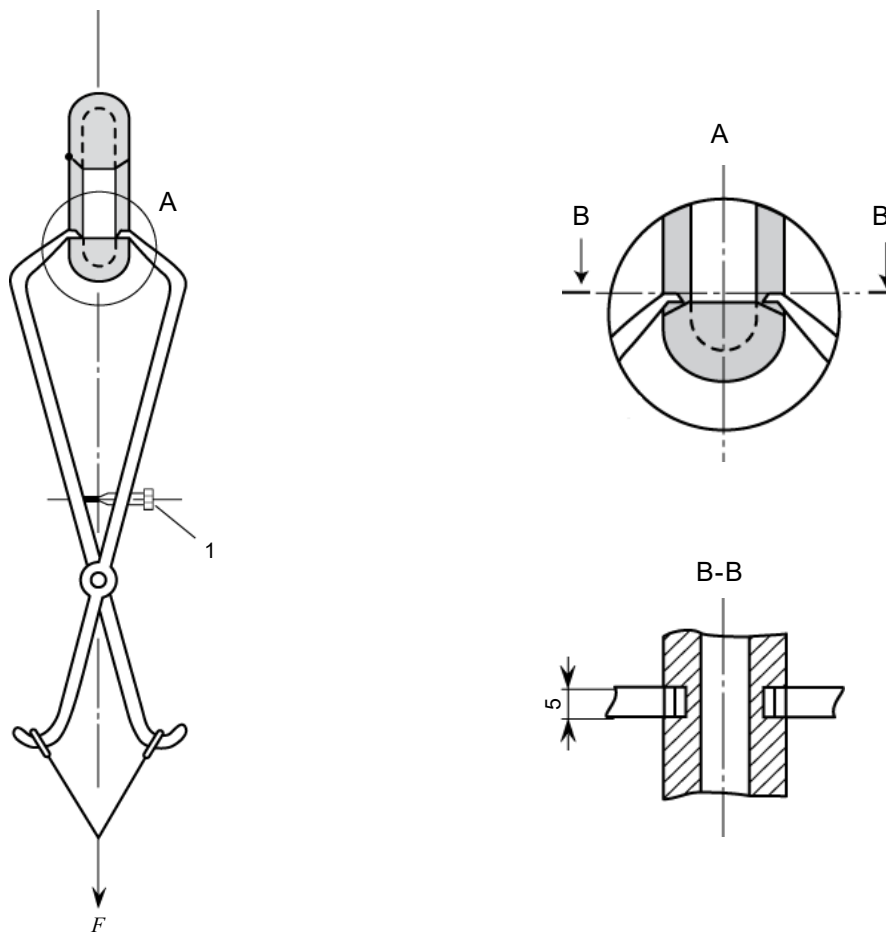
Principle of the testing device for checking adhesion of the insulating coating on conductive parts of the insulated hand tool – Test on the working head – Method A
